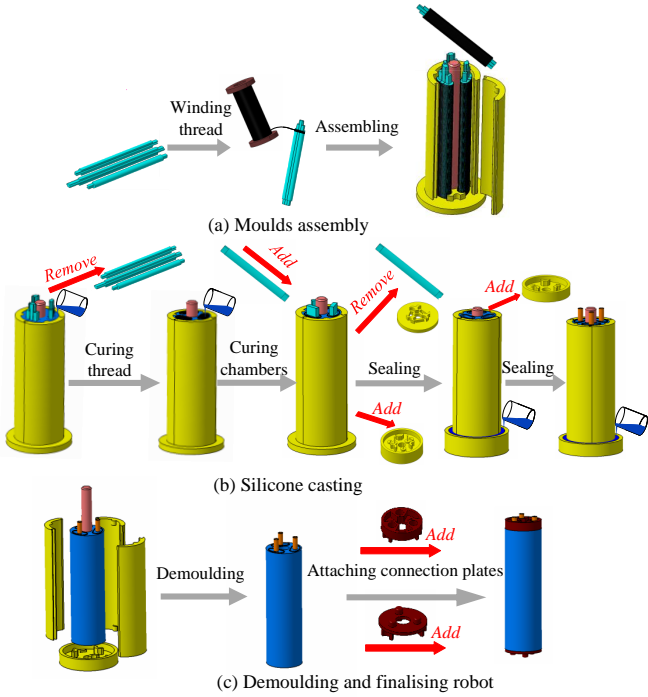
Fabrication of each robot design: (a) \rightarrow (b) \rightarrow (c). Please note the chambers shown here are from the type-2 robot. (a) Moulds assembly: One set of chamber moulds is comprised of an inner core and two identical slide parts. In-extensible thread is wound around the assembled chamber moulds before properly positioning all moulds. (b) Silicone curing: after pouring the silicone (EcoFlex 0050, Smooth On) into the moulds, the assembled chamber moulds are slid out once the silicone completely cures. In this way, the thread is partially embedded in the body of the robot. A thinner chamber mould is then inserted and cast into the inner side of the chamber, which fully integrates the thread into the silicone body. The next step is to seal the bottom and top of the robot using a harder silicone (DragonSkin 0030, Smooth On). Finally, the pneumatic pipes can be connected to the chambers via reserved holes. (c) Demoulding and finalising the robot: The last step is to attach connection plates to the fully demoulded robot.
